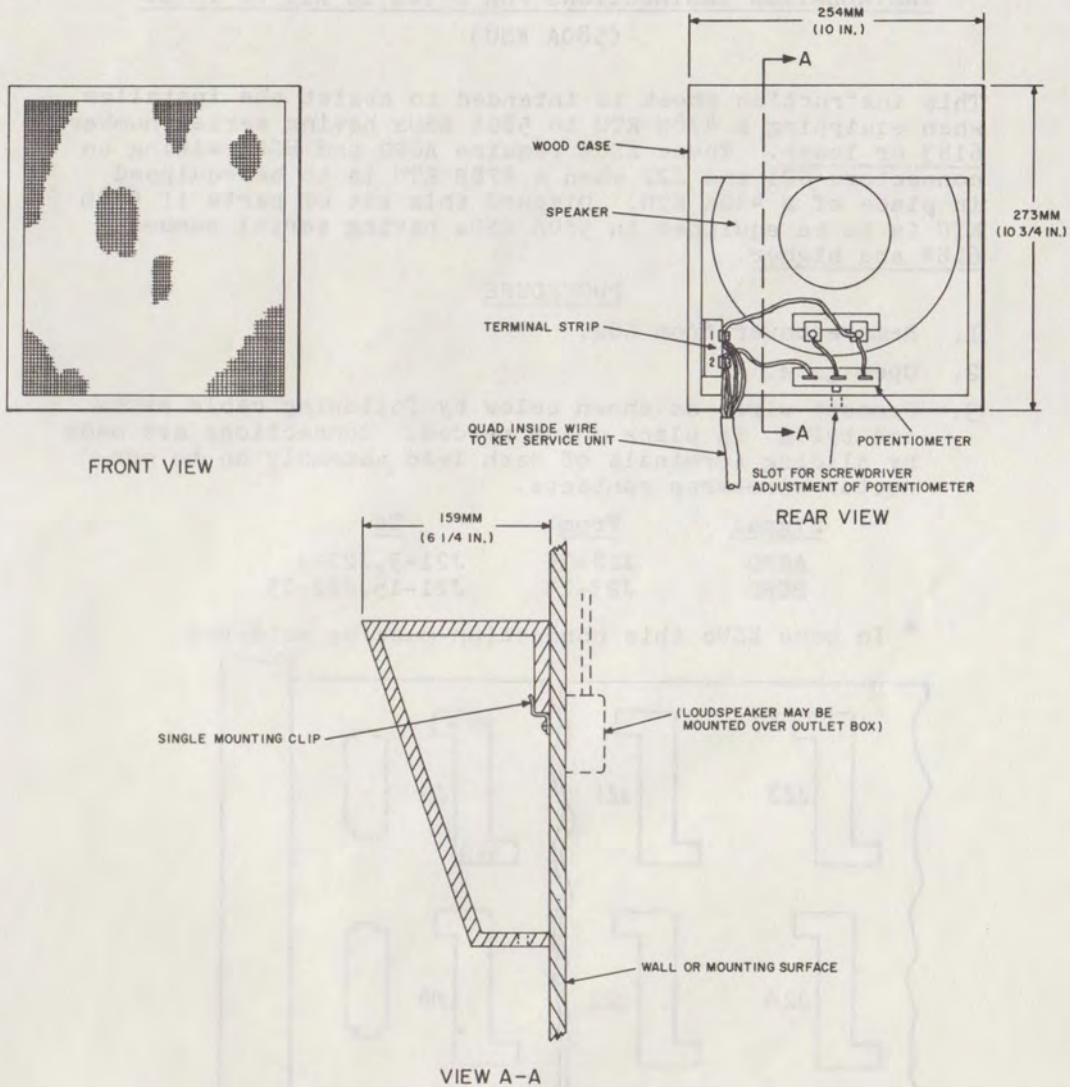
KS-21880, L1 Loudspeaker, Connections and Mounting
